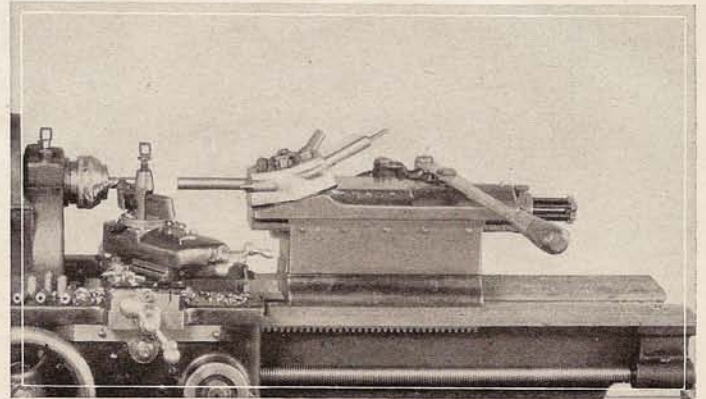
No. 22—9-inch Junior Lathe Equipped with Draw-in Collet Chuck Attachment and Hand Lever Bed Turret for Screw Machine Work
